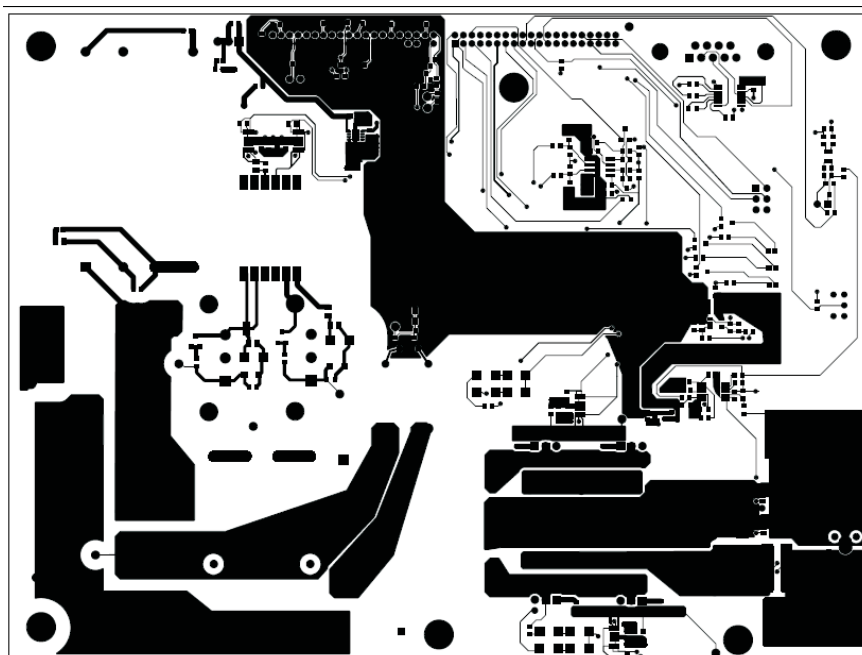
UCD3138LLCEVM-028 Top Copper (top view)
